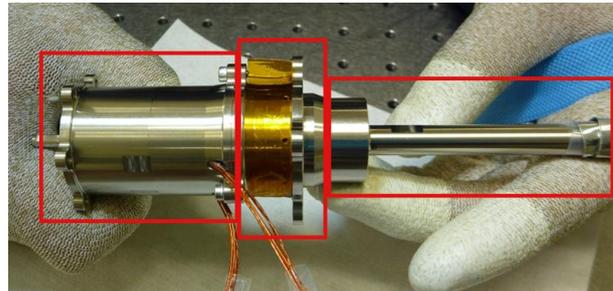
SCM drive unit (motor, gear, bearing & shaft)
